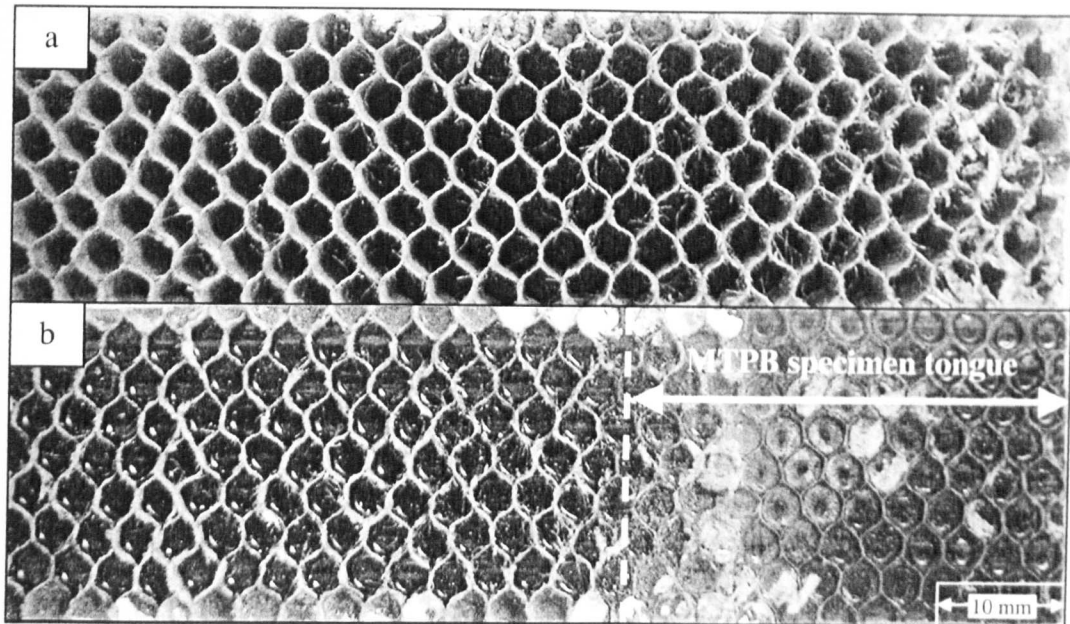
Fracture surfaces of a MTPB specimen from Structure A, (a) core surface, (b) face-sheet surface.
